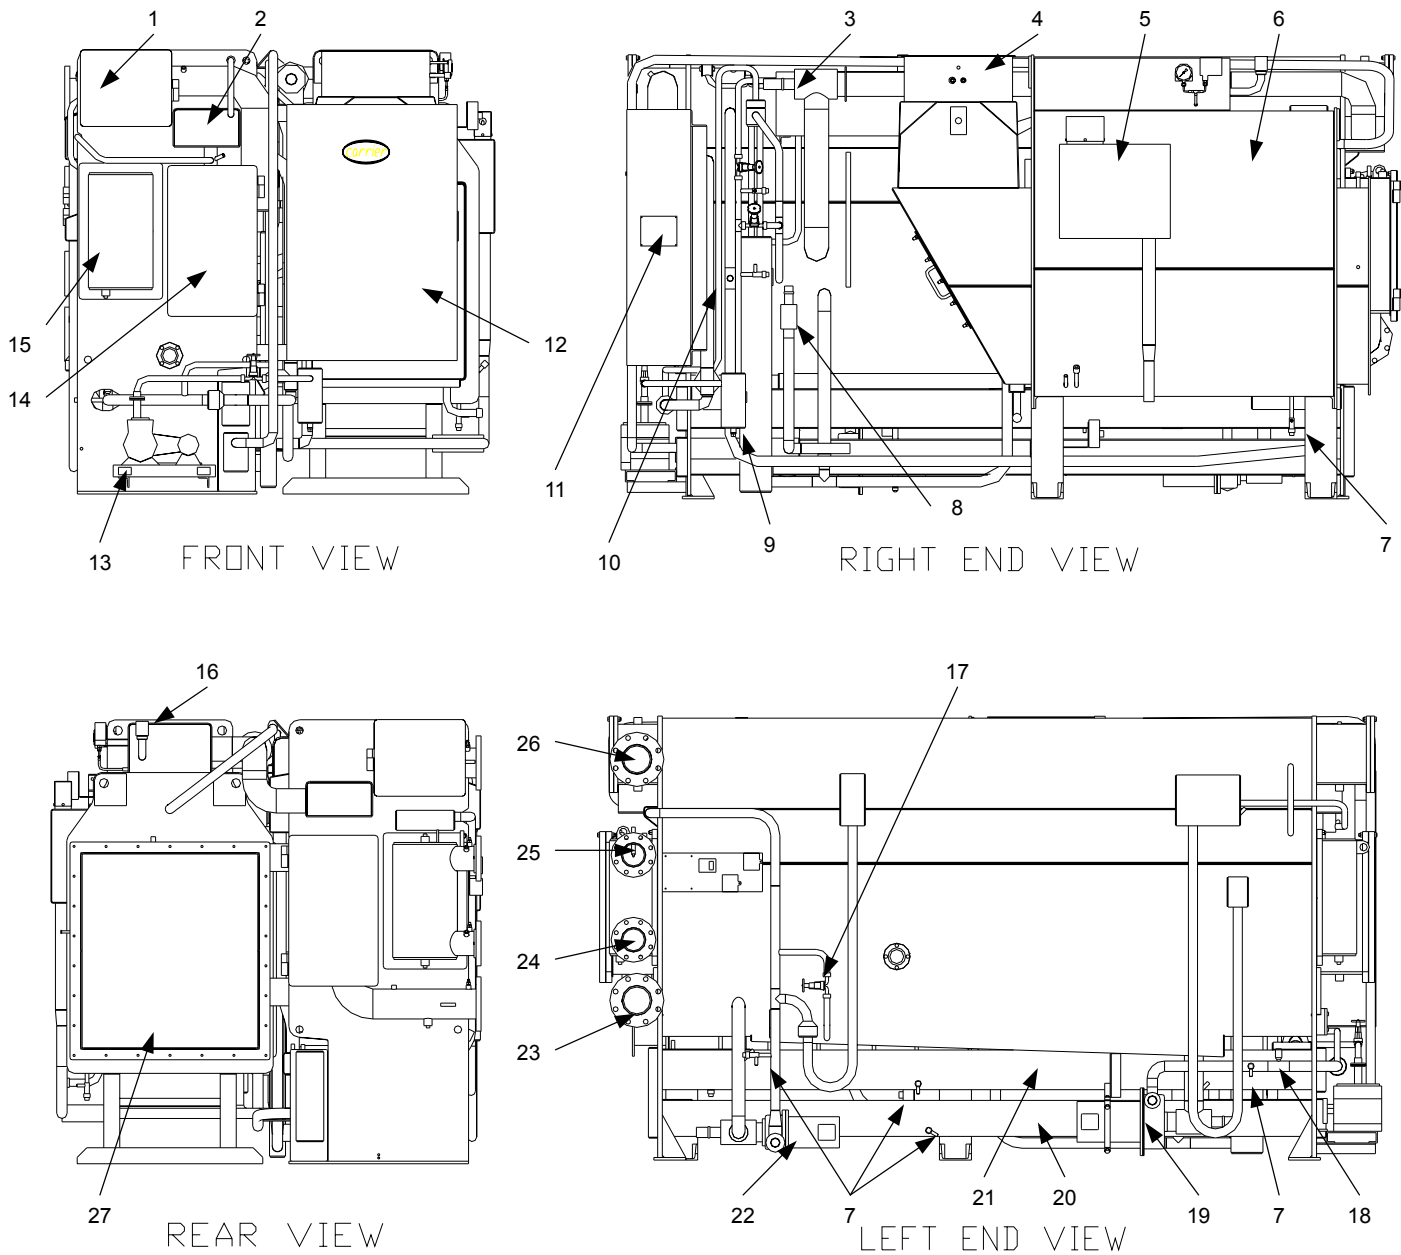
Typical External Schematic, Front View (16DNP012 Smoke tube type chiller)
